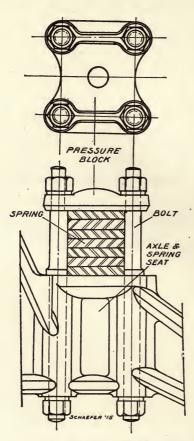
Method of Mounting Vulcan Five-Ton Springs.
